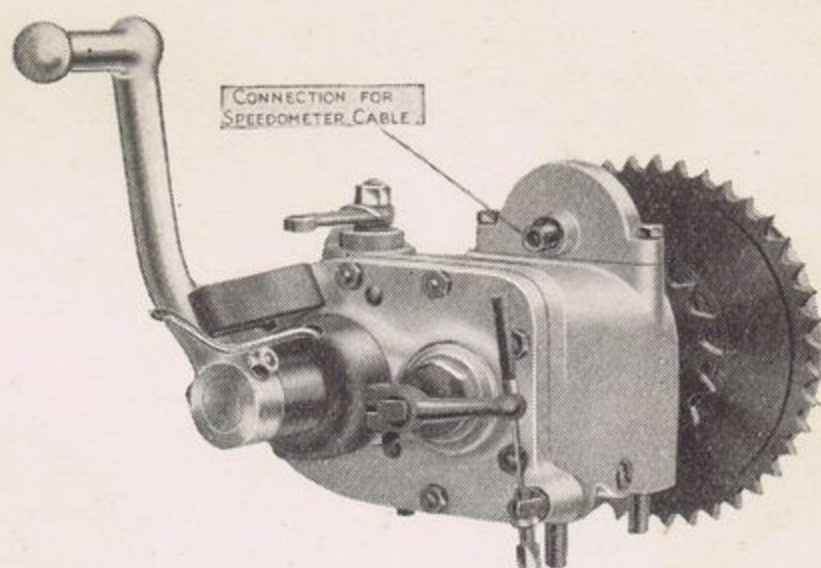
THE THREE-SPEED, L.S. TYPE STURMEY-ARCHER GEAR-BOX AND CLUTCH
